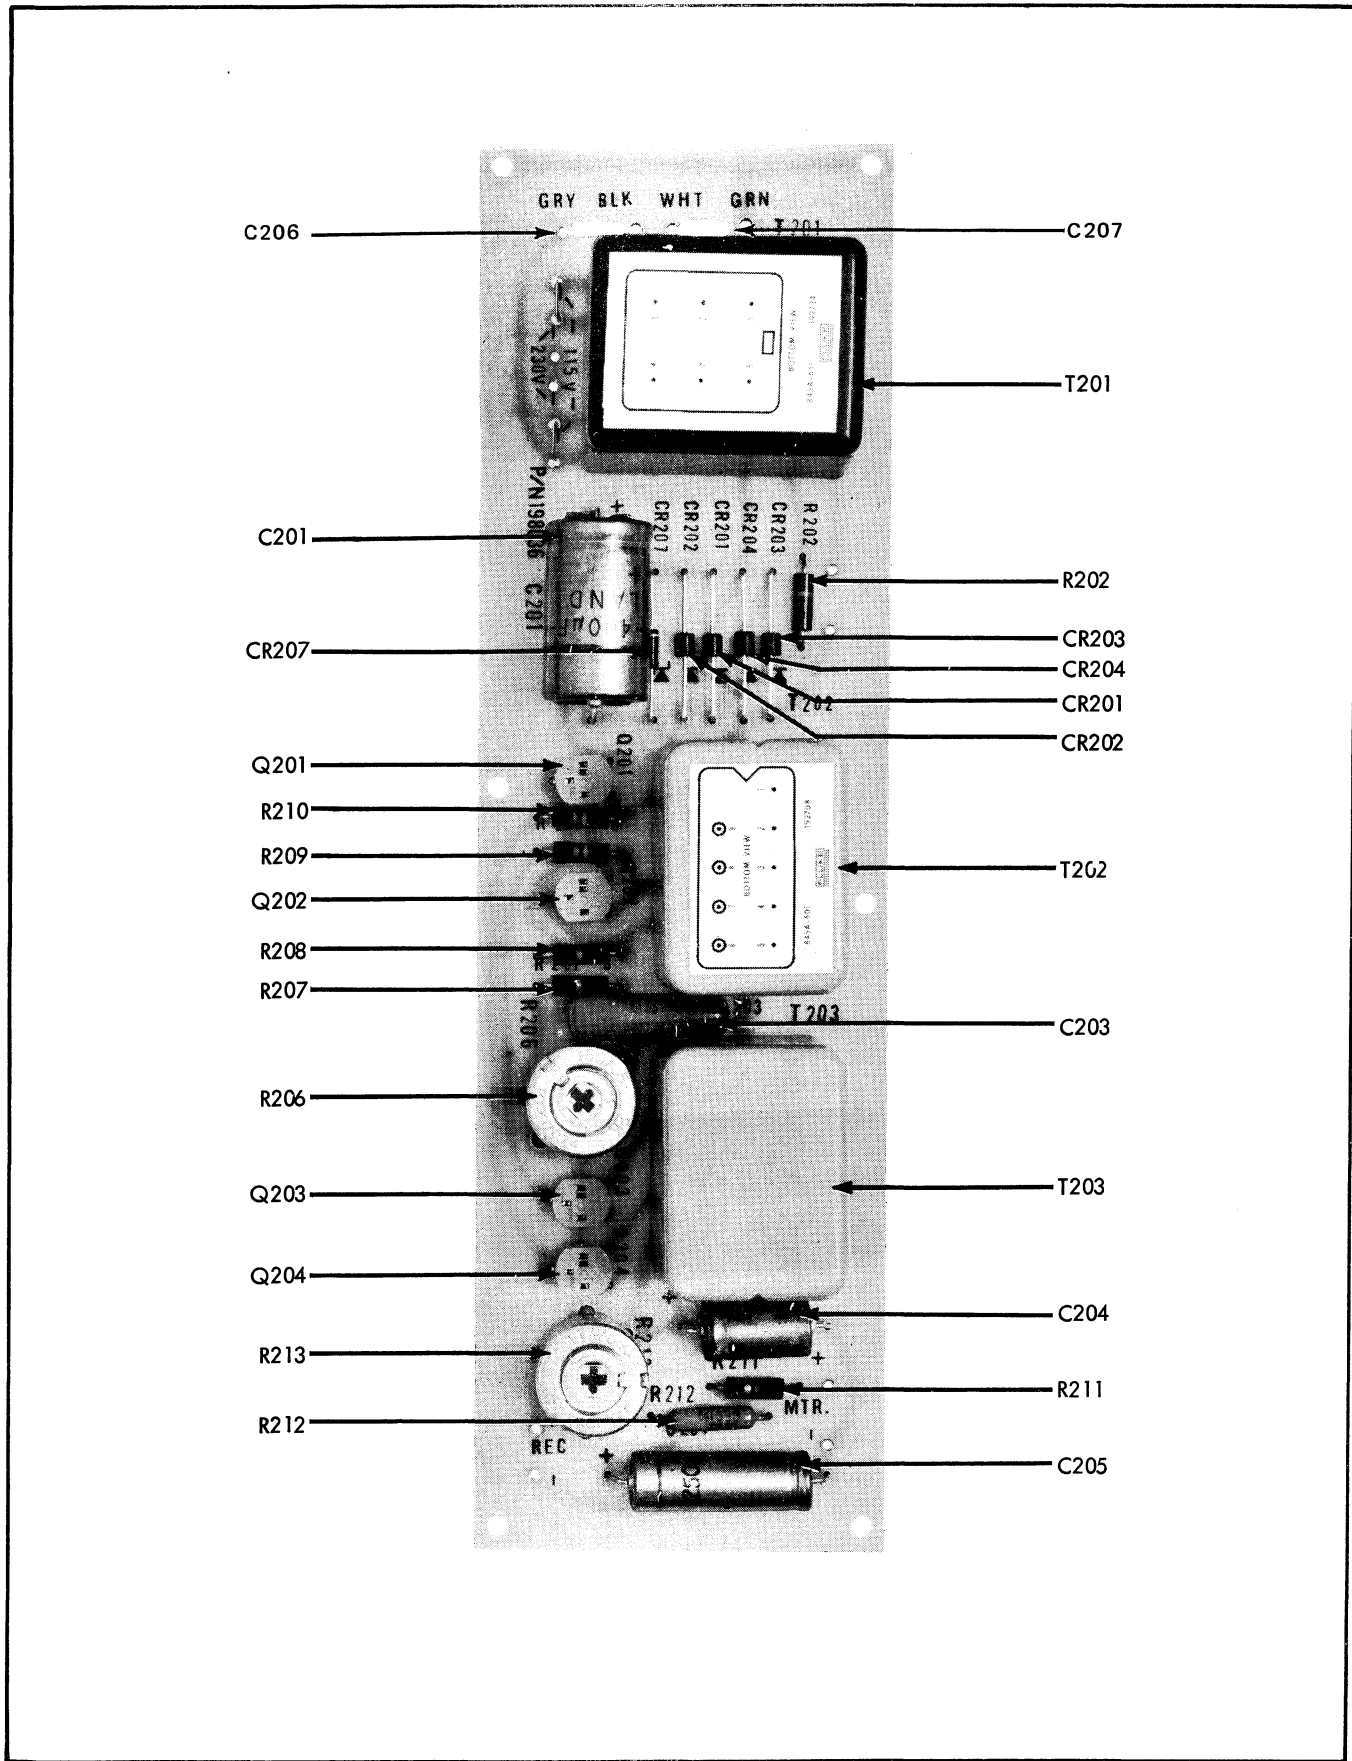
POWER SUPPLY P/C ASSEMBLY
